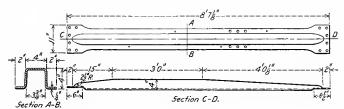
Pressed Steel Side Post Used on Pennsylvania Steel Frame Box, Stock and Refrigerator Cars. See Figs. 270, 271, 361 and 363.
